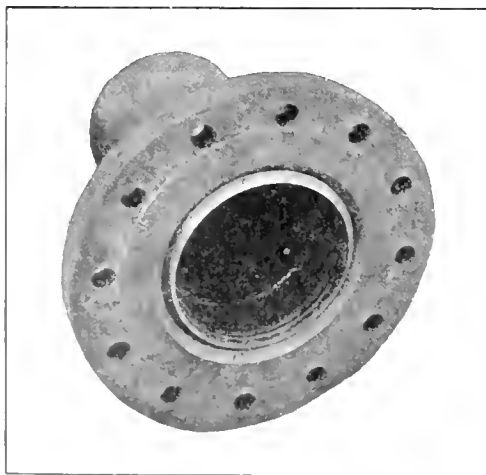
PIPE END AND FLANGE, READY FOR WELDING
